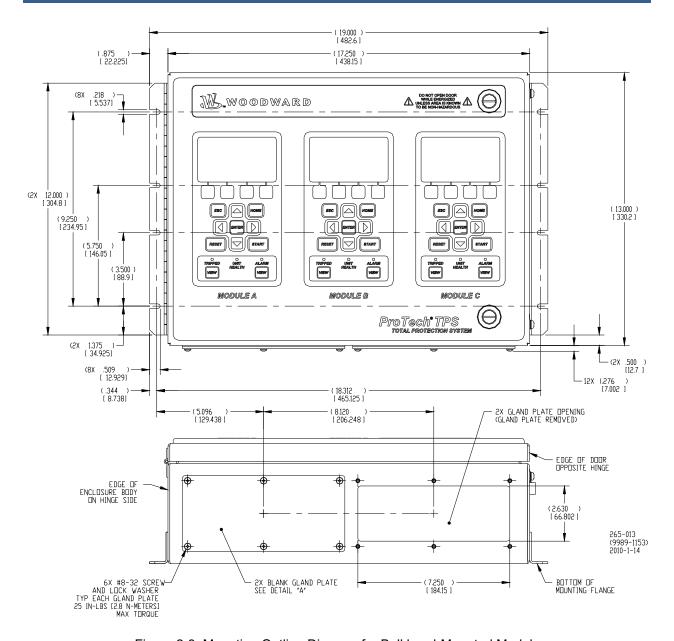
Mounting Outline Diagram for Bulkhead-Mounted Models
